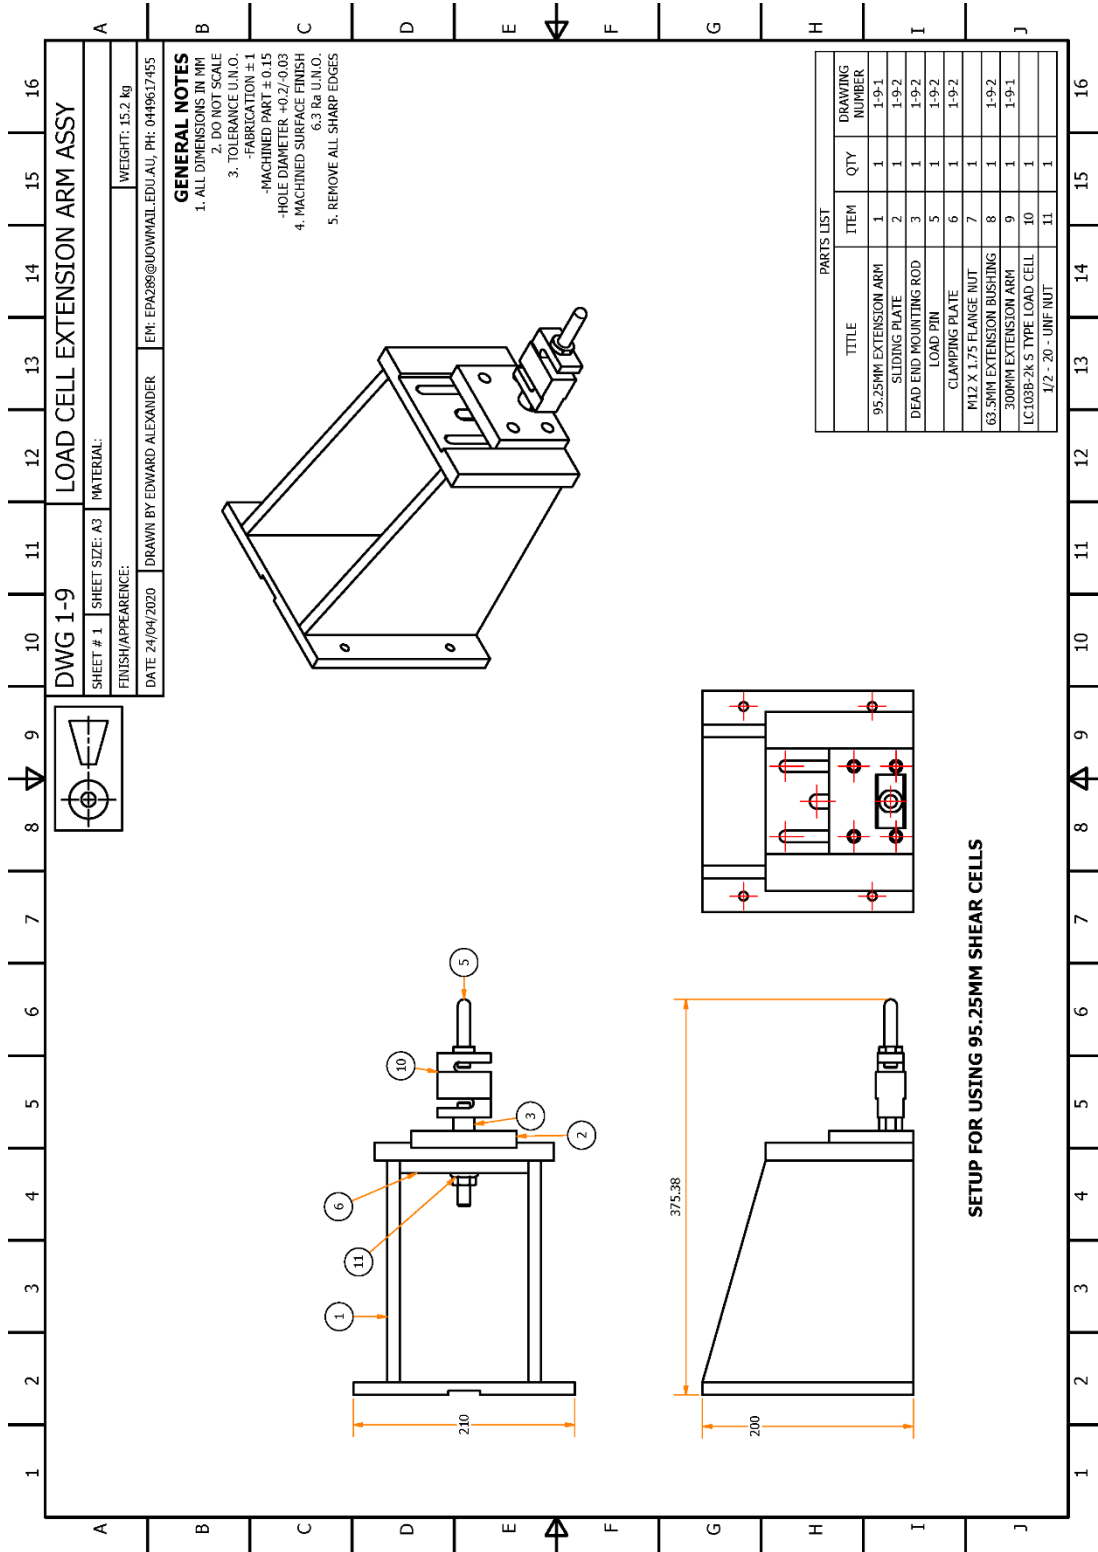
Load cell extension arm assembly drawing – sheet 1
